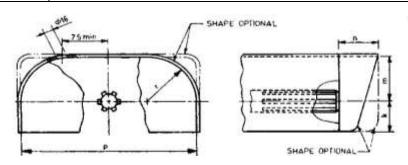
(b): DIMENSIONAL NOTATION FOR PTO SHAFT MASTER SHIELD
